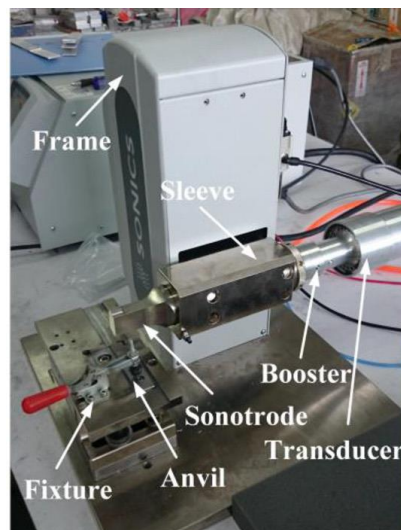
Ultrasonic spot welding system (Feng et al., 2018)
